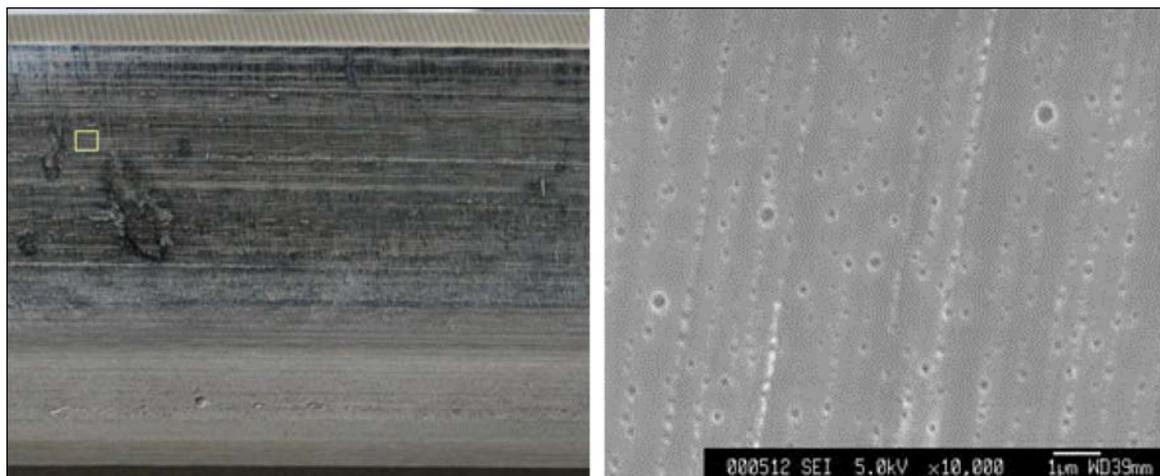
Tooth flank after long heavy usage (left) and the observed SEM picture.
